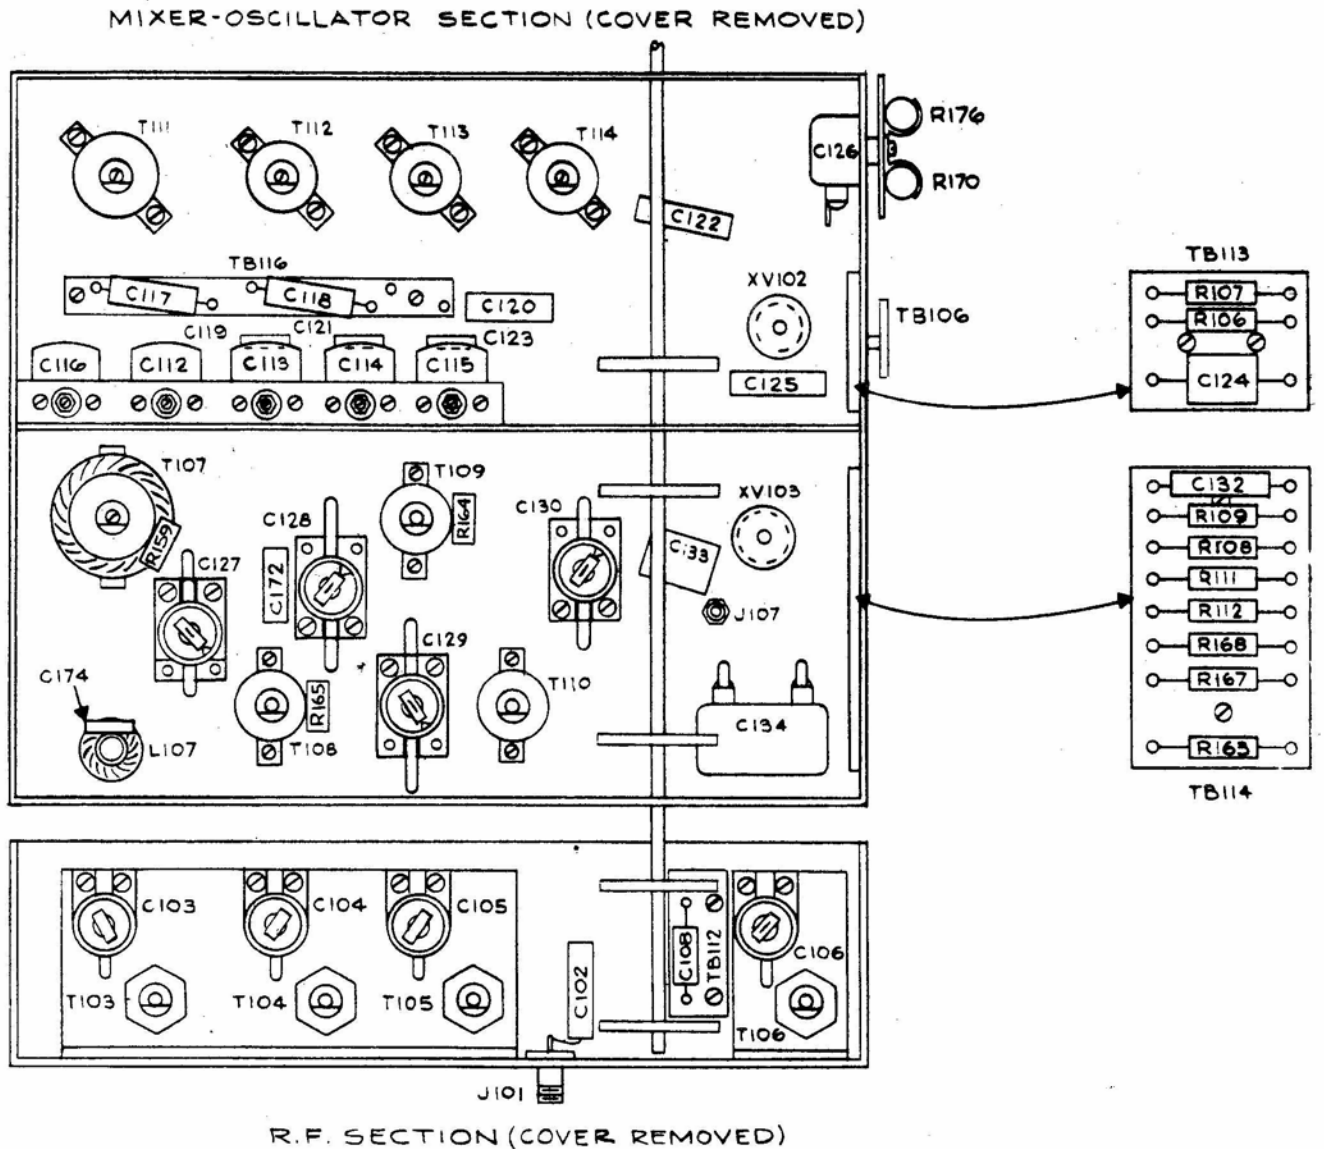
Receiver Chassis Bottom View, Parts Location Diagram, Part 2
